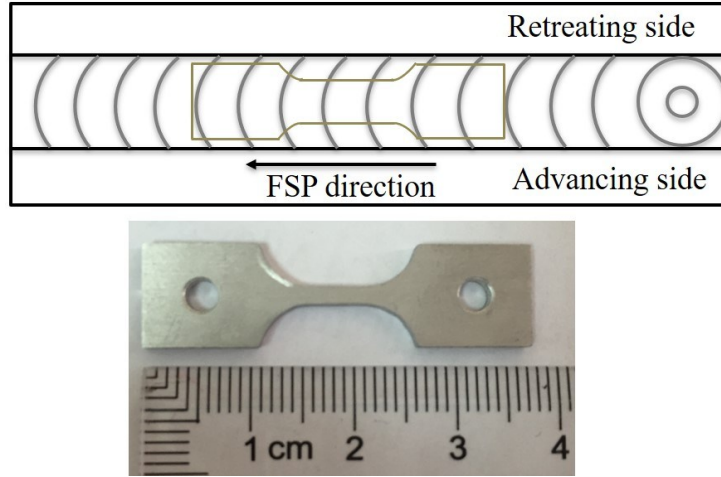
Schematic diagram of FSP and the dimension size of tensile test samples.
